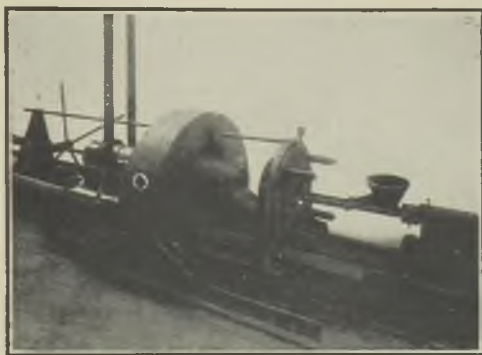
CENTRIFUGAL CASTING MACHINE
